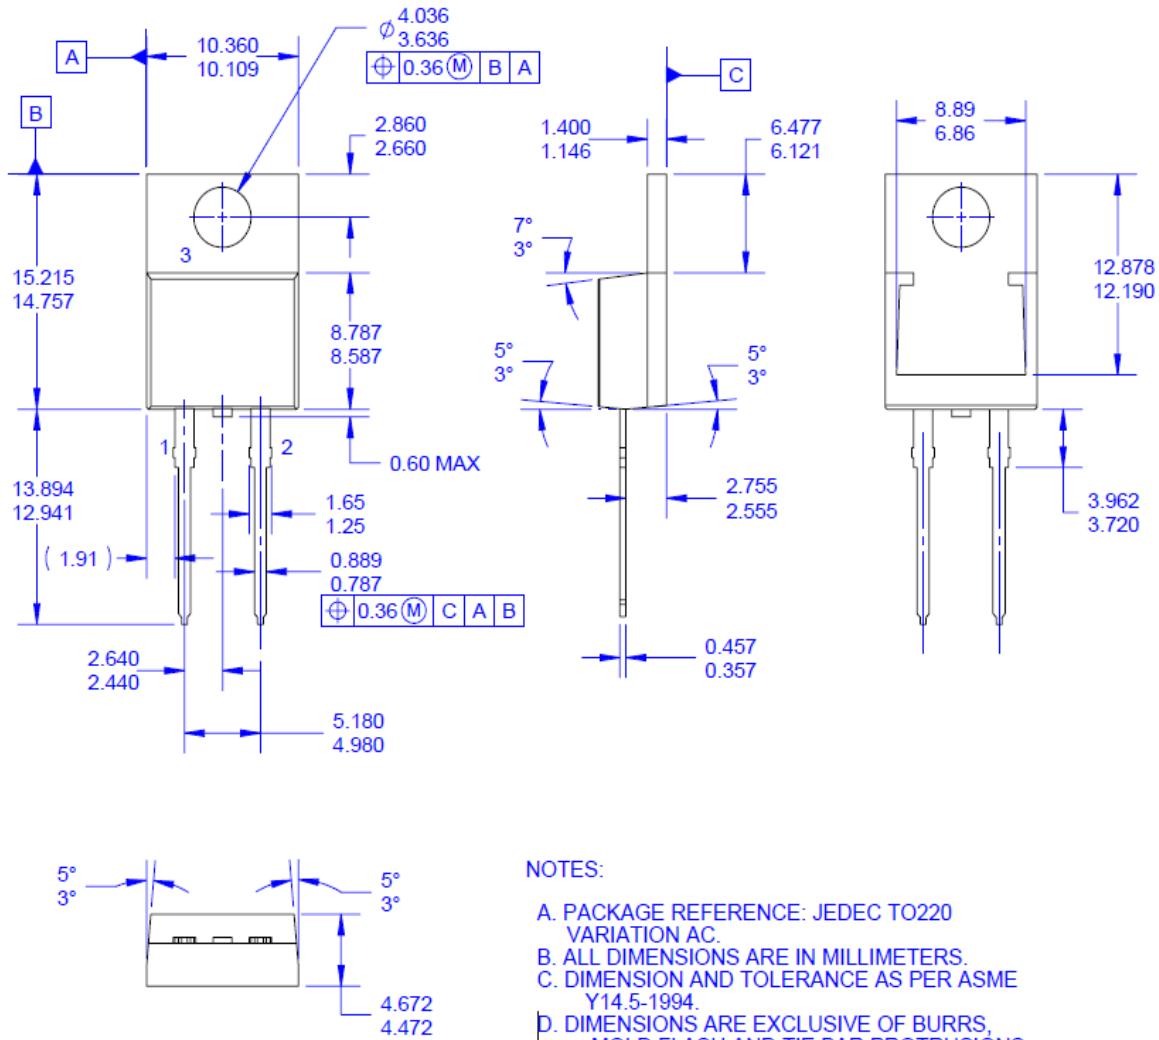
TO-220 2L - TO-220, MOLDED, 2LD
